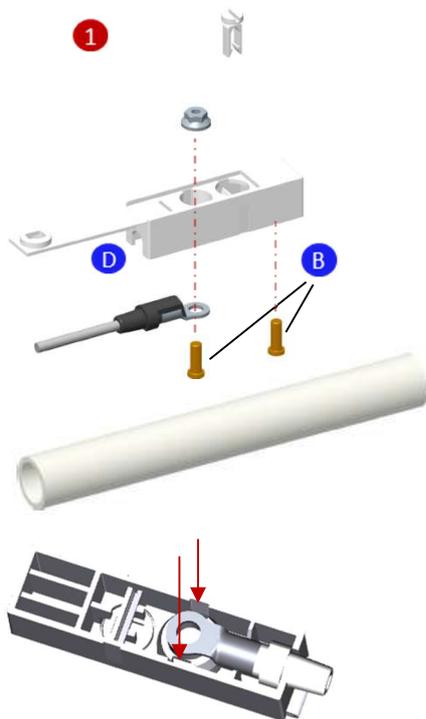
Routing aid for fastening the remote sensor housing using a cable tie
